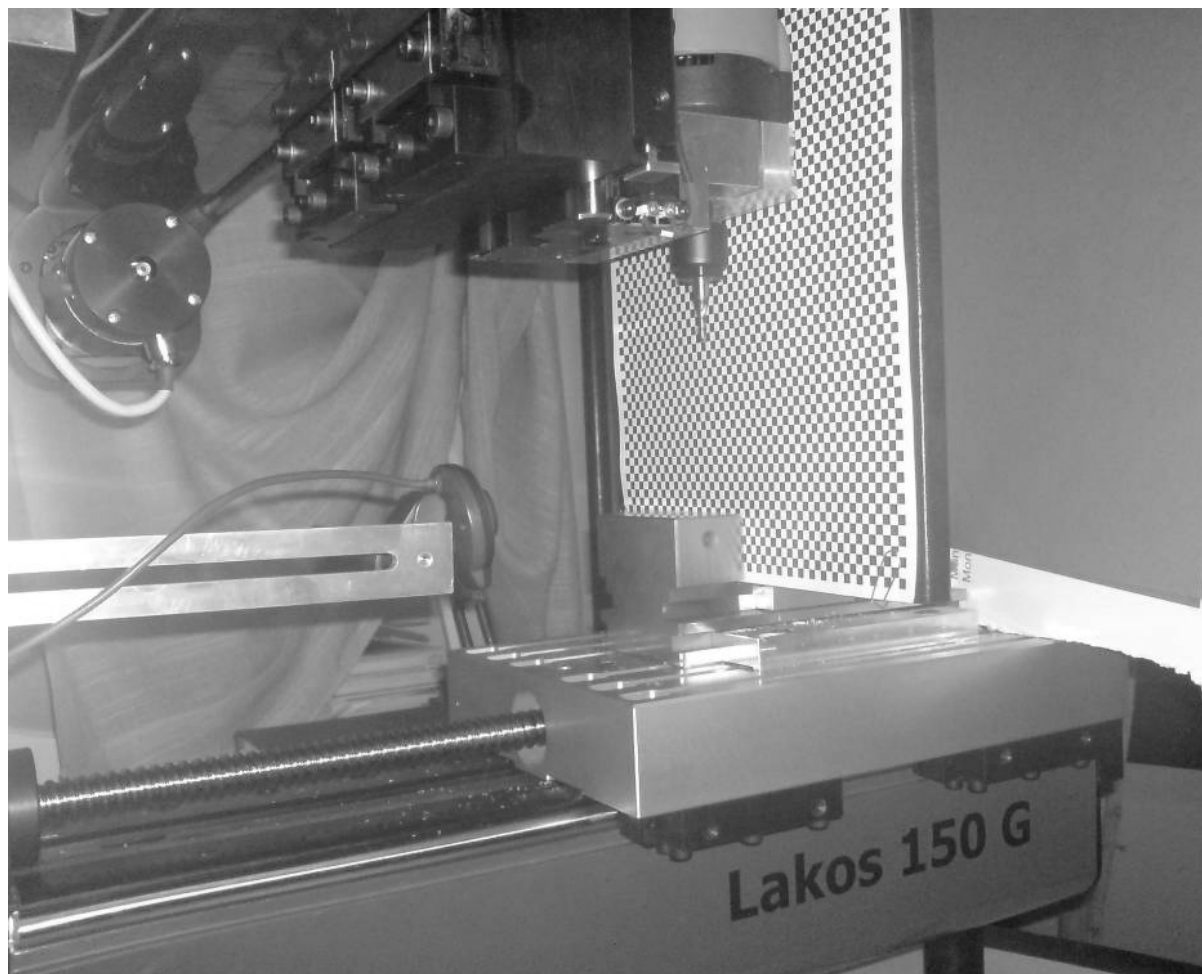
Stand holder for the camera and camera on the LAKOS 150G milling machine.
